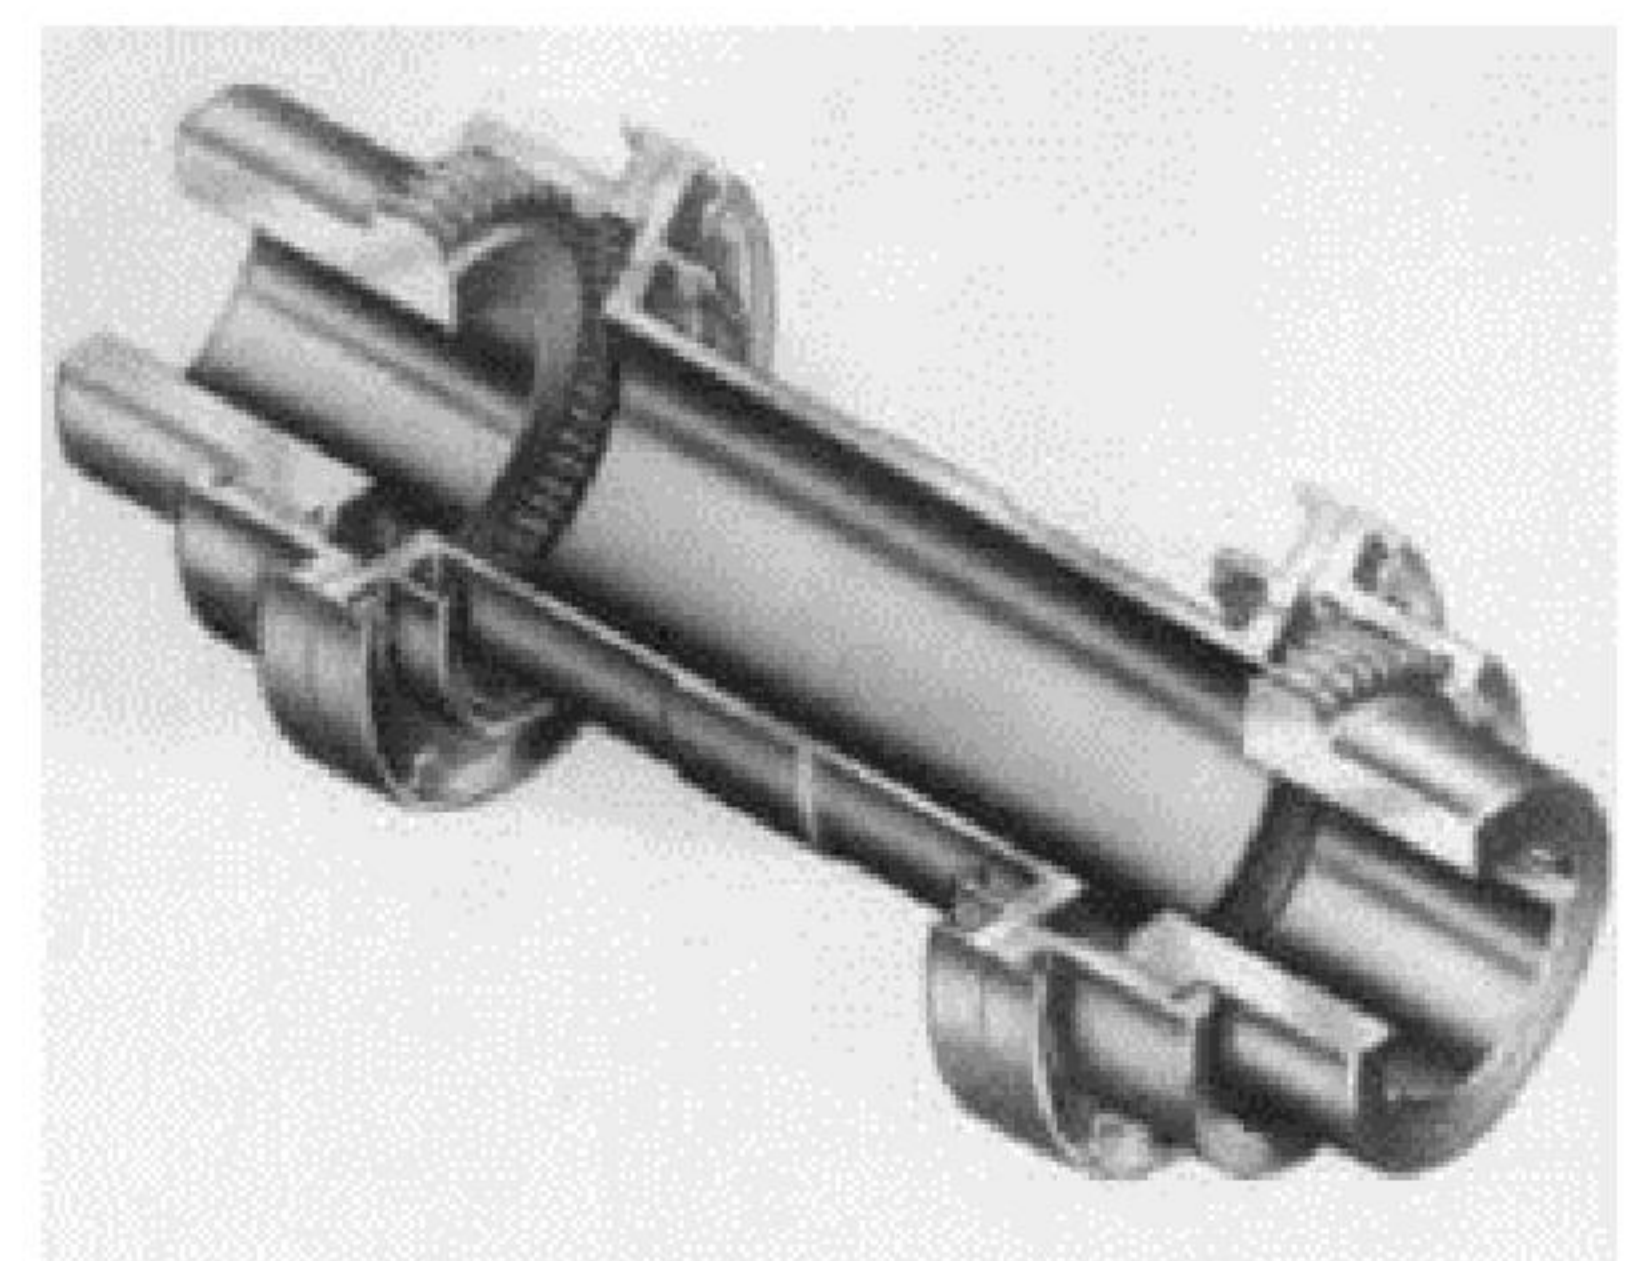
Gear-tooth coupling, high-speed spacer type. (*Zurn Industries, Inc.*)
